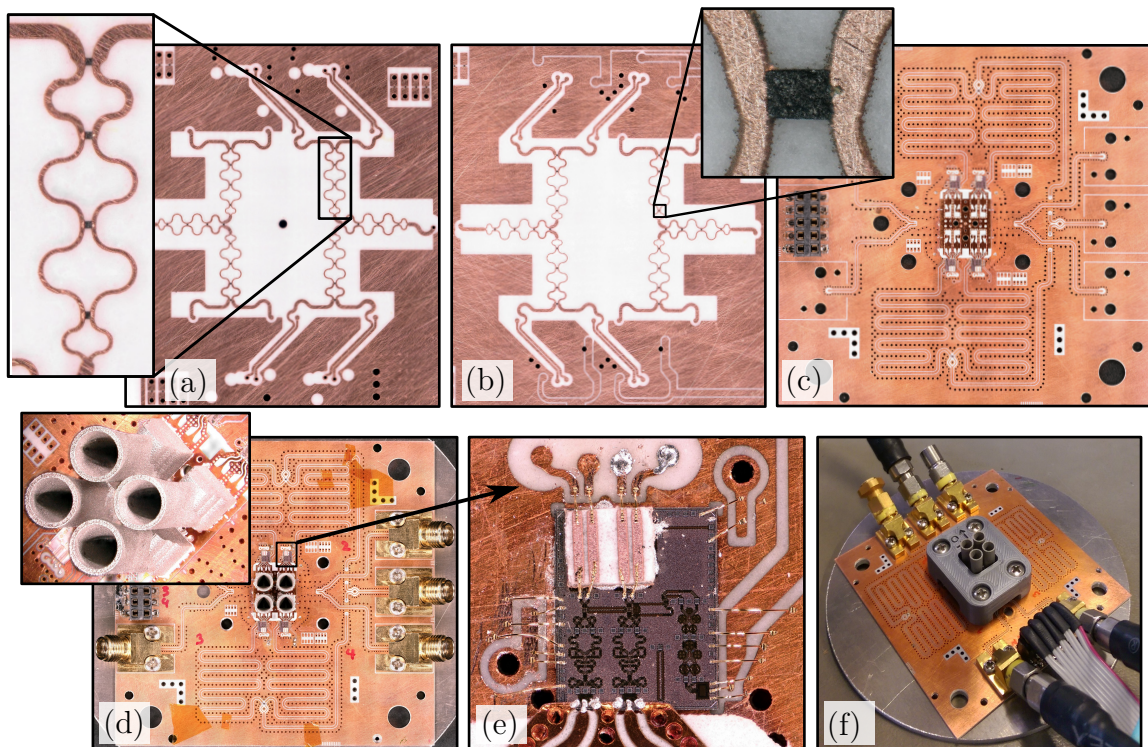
Manufacturing of the 2x2 active array receiver. (a) and (b) Inner layers of the base PCB with the power combiners, (c) top view of the base PCB with the chips and RF PCB mounted, (d) complete receiver with detail view of the four antennas, (e) zoom on one of the four chips with bypass line and bond wires, (f) receiver with plastic cover mounted on the circular aluminum plate with RF and DC connectors for measurements.
